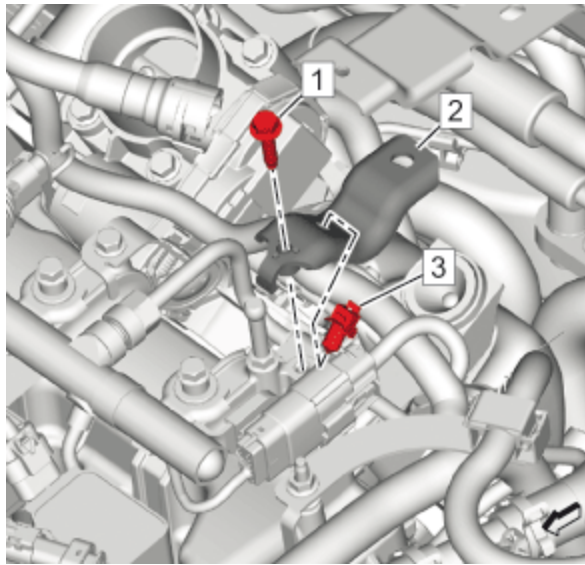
Air Cleaner Resonator Bracket, Bolt And Wiring Harness Clip
